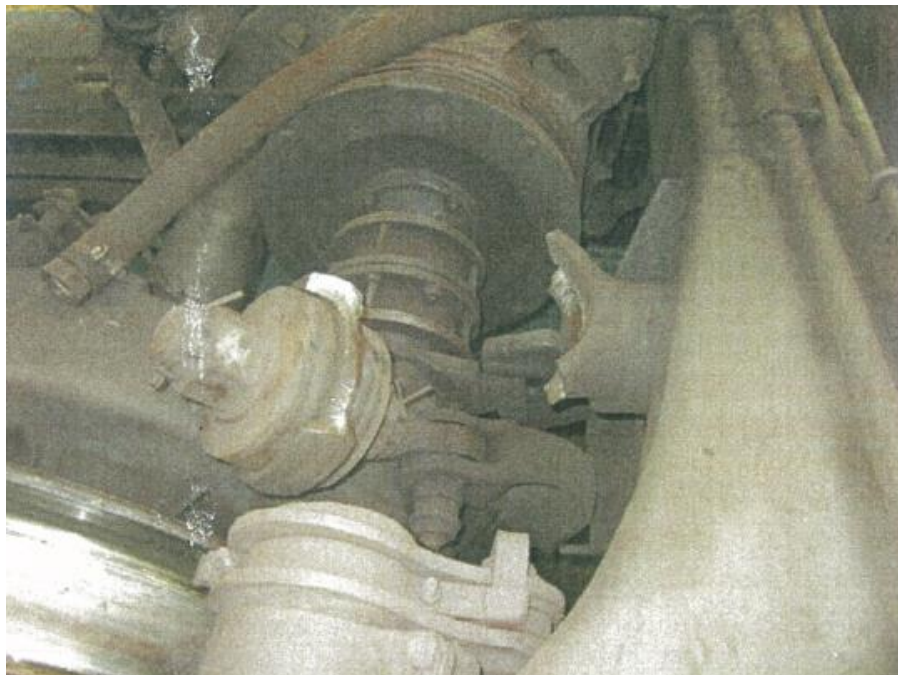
Breakage of the gearbox mounting bracket on an E-type carriage.
